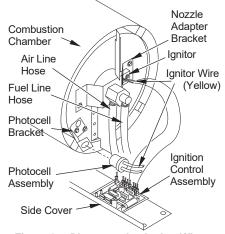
Disconnecting Ignitor Wires from Ignition Control Assembly
